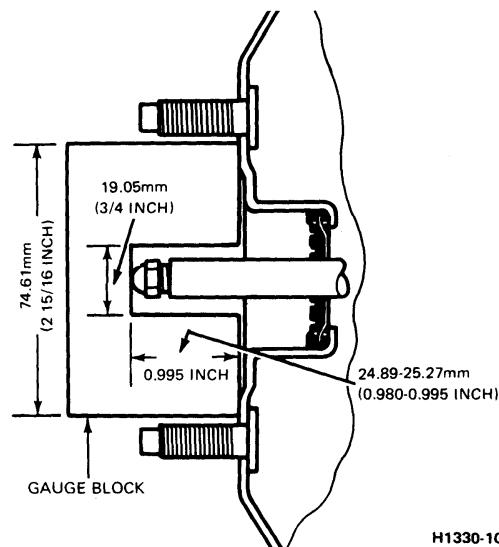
Bendix Booster Push Rod Gauge Dimensions and Adjustments—Bronco, E-100—E-350 and F-100—F-350
